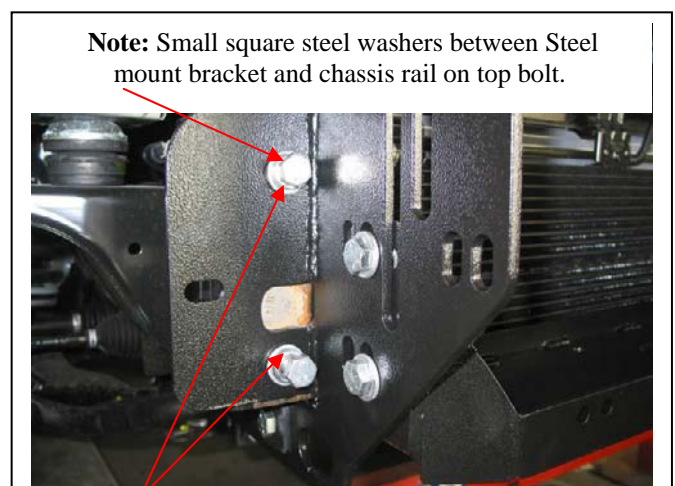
Bolts in chassis rail in top and bottom to suit duel cab. Extra cab sits side to side
